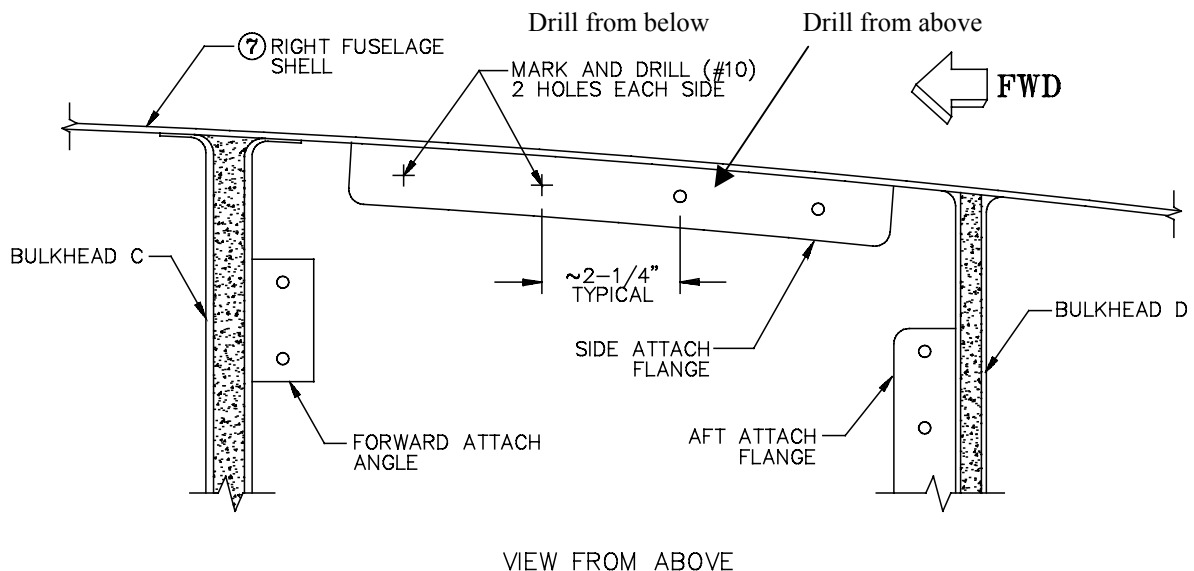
Marking and Drilling the Forward Bolt Hole Locations in the Side Attach Flanges
